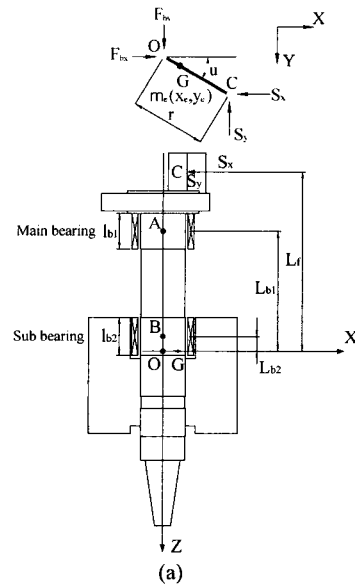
Analysis model for the crankshaft-journal bearing system.
